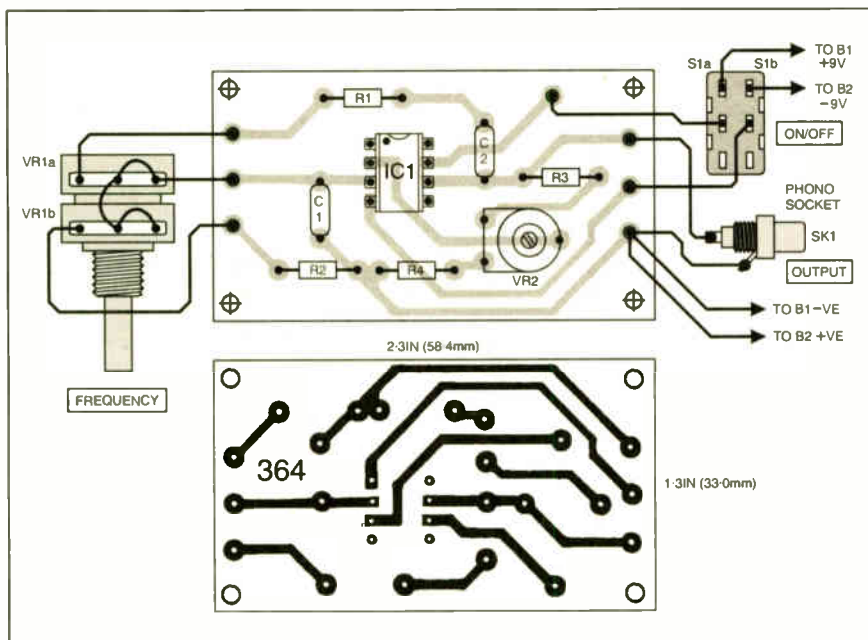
Low Frequency Oscillator printed circuit board component layout, interwiring to off-board components and full-size underside copper foil master pattern.
